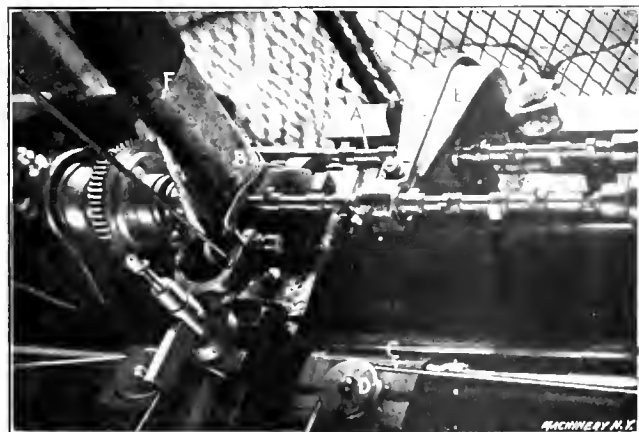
Top View of Lathe equipped with Cam-grinding Attachment
